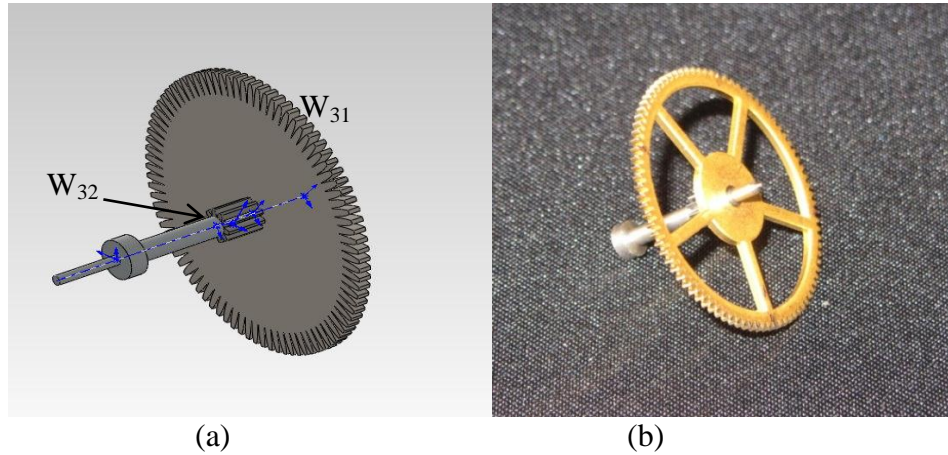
Third wheel, W_{31} , and wheel, W_{32} , of the gear train with (a) Solidworks view, and (b) photograph of third wheel assembly
